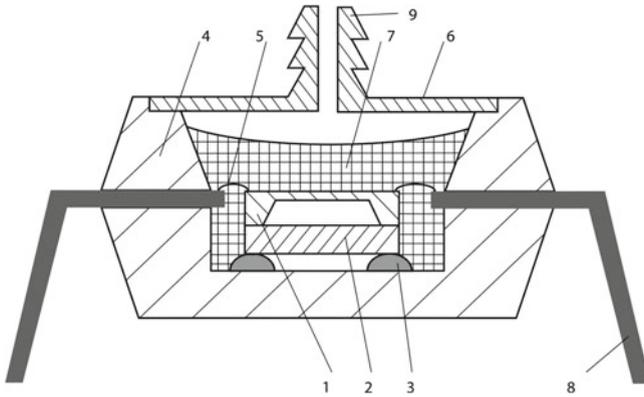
Assembled pressure sensor chip: 1 sensor chip, 2 glass counter-body, 3 gluing points for chip fixing, 4 IC housing, 5 metal wire bridges, 6 cover, 7 protection gel, 8 electrical connections (lead frame), 9 measuring pressure inlet
